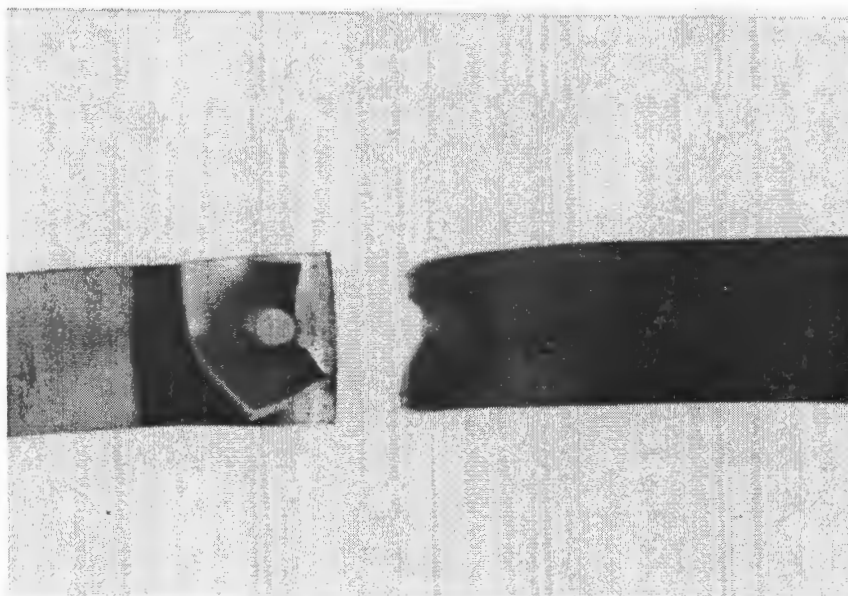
Typical failure of an improved plug weld tensile shear specimen.
